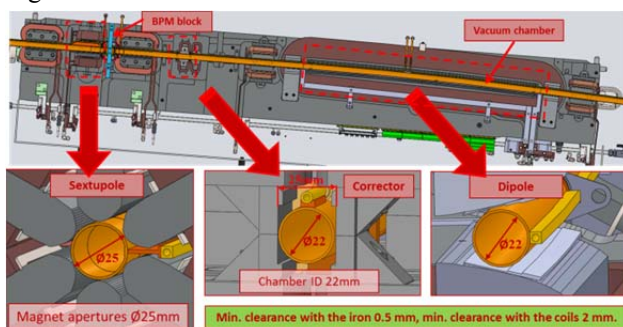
Top view of one opened magnet block with the vacuum pipe placed and detailed views of cross-sections of sextupole, corrector and dipole magnets.
